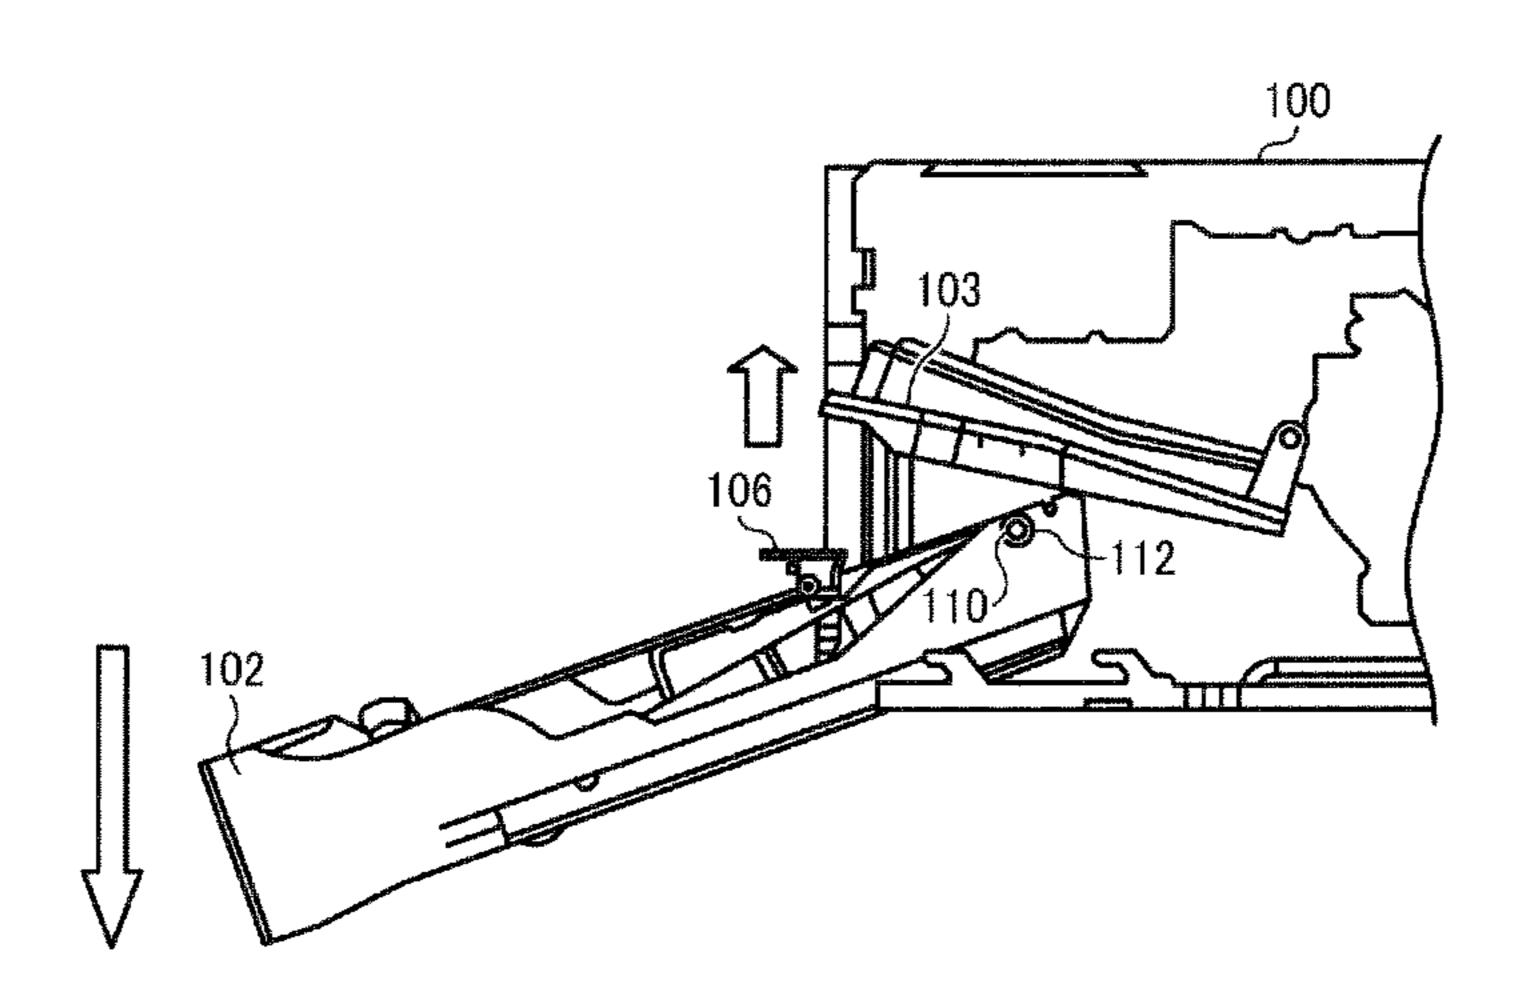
IMAGE FORMING APPARATUS WITH ROTATABLE SHEET FEED UNIT
